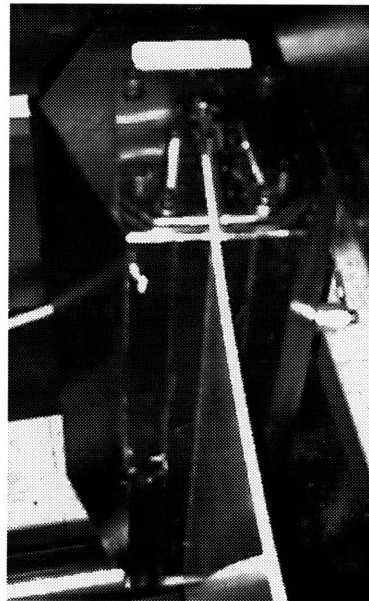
Photograph of the Clamp Gripping 0.063 Inch Aluminum
